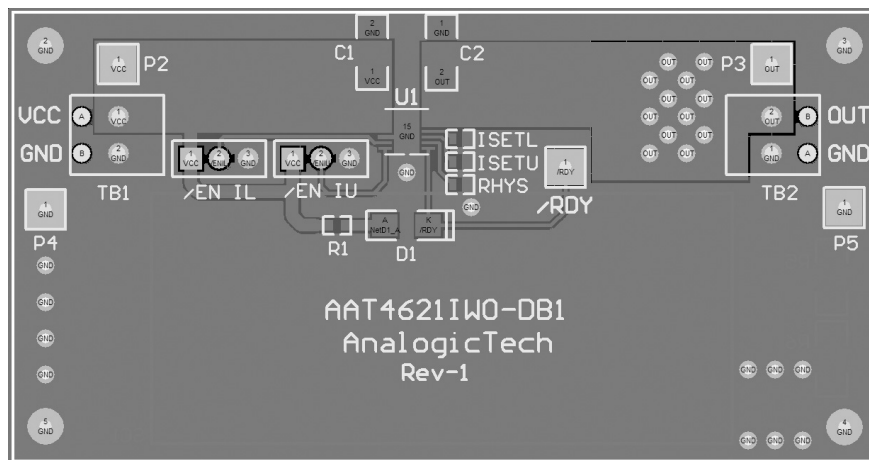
AAT4621 TDFN33-14 Evaluation Board PCB Top Side
